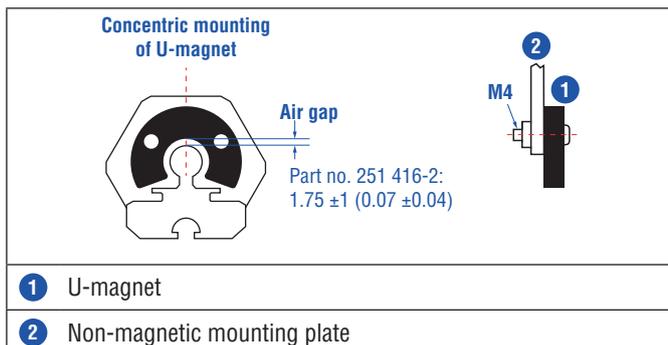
Mounting of U-magnet (part no. 251 416-2 or part no. 201 553)
